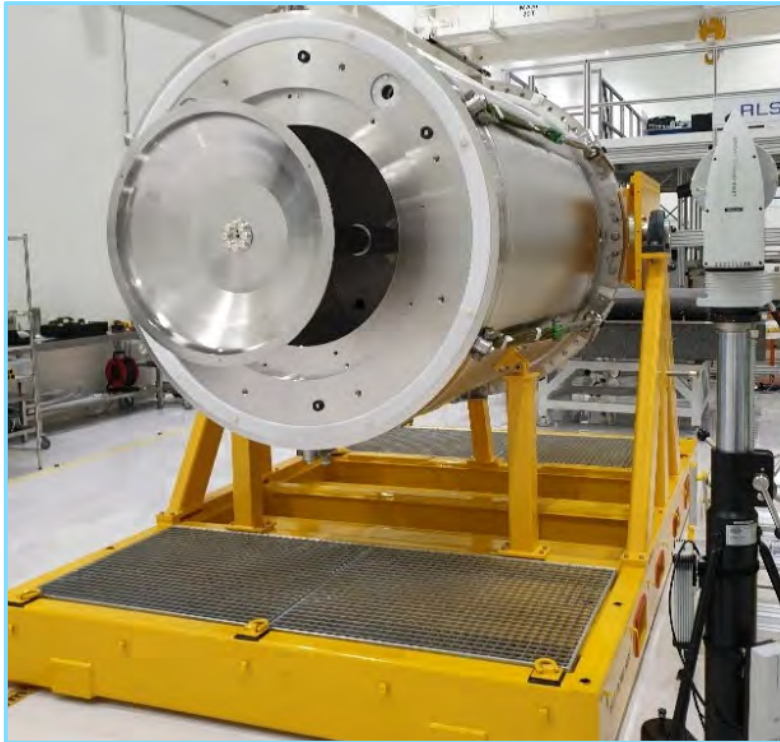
Torus and Cryostat cryopump – Casing and valve assembly
